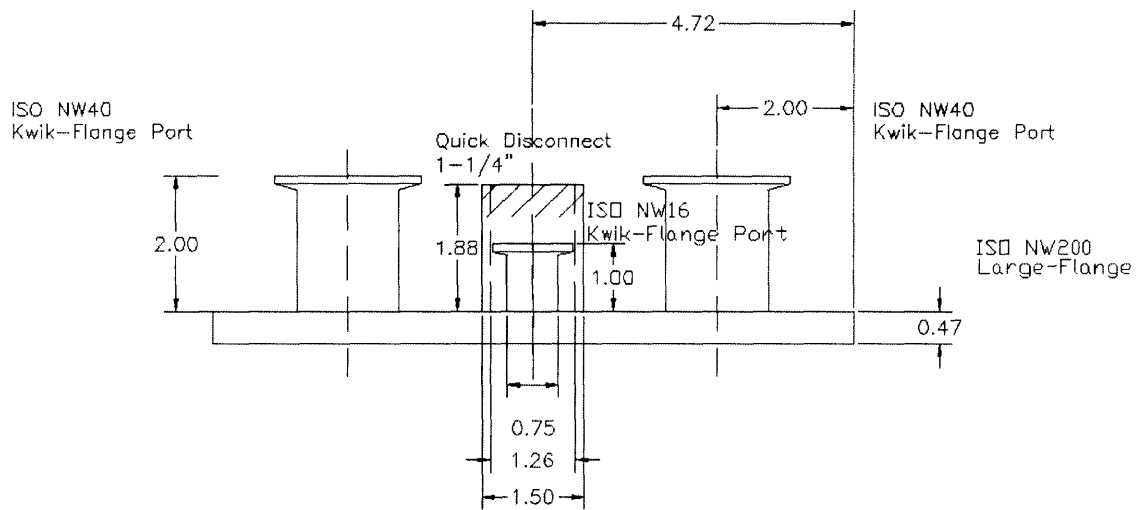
CAD drawing of redesigned reactor lid accommodating ultrasonic atomizer (side view).
